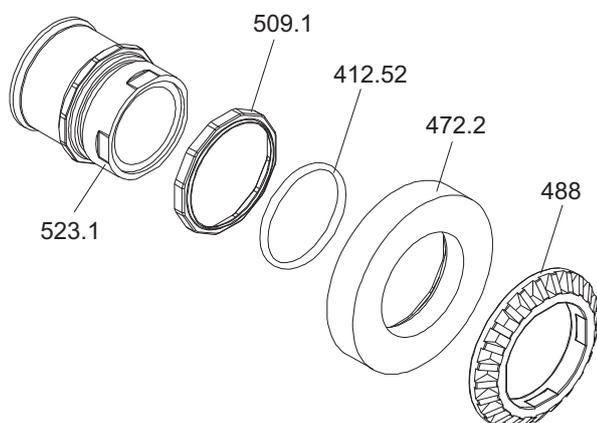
Dismounting the KSS-RS/D atmosphere-side shaft sleeve
